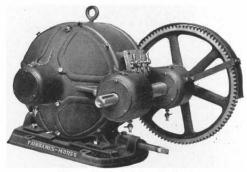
Fairbanks-Morse Enclosed Back-Geared Motor
